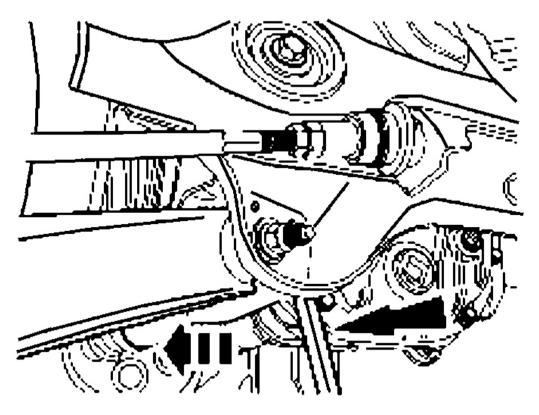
Moving Lower Arm Outward To Decrease Camber Courtesy of FORD MOTOR CO.
